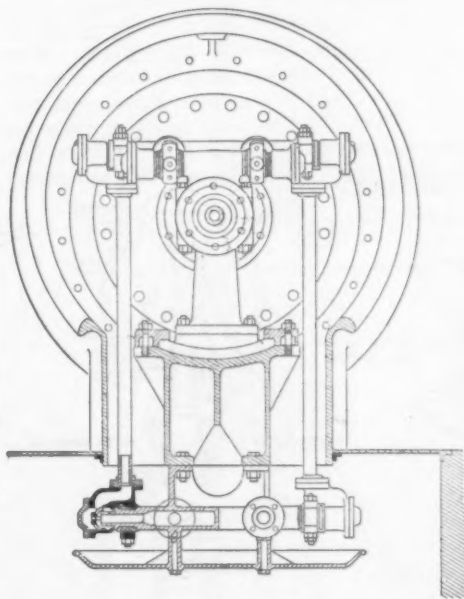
Supply of Cooling Water Through Jointed Pipes.
